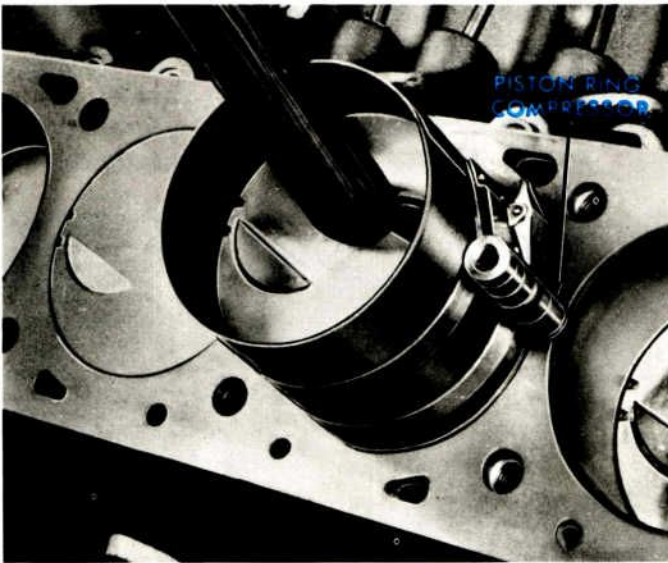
INSTALLING PISTON AND CONNECTING ROD ASSEMBLY
